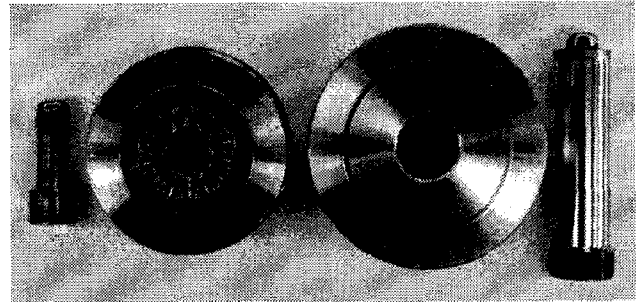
Dies and punches for the enclosed die forging of a bevel gear
